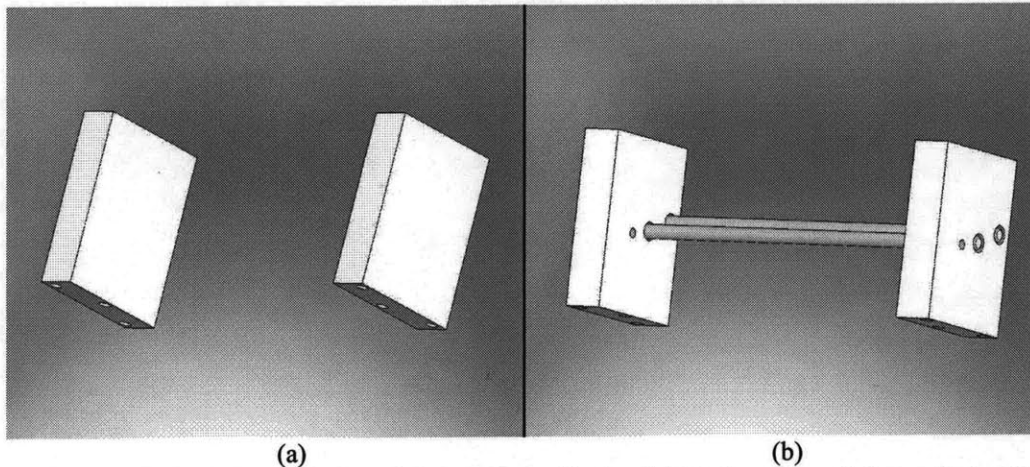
H (a) Original design of plate cylinder blocks; (b) Final version of plate cylinder blocks.
